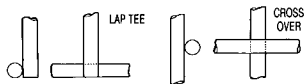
Designs for sealed joints by weld-all-around techniques (high-temperature service).
